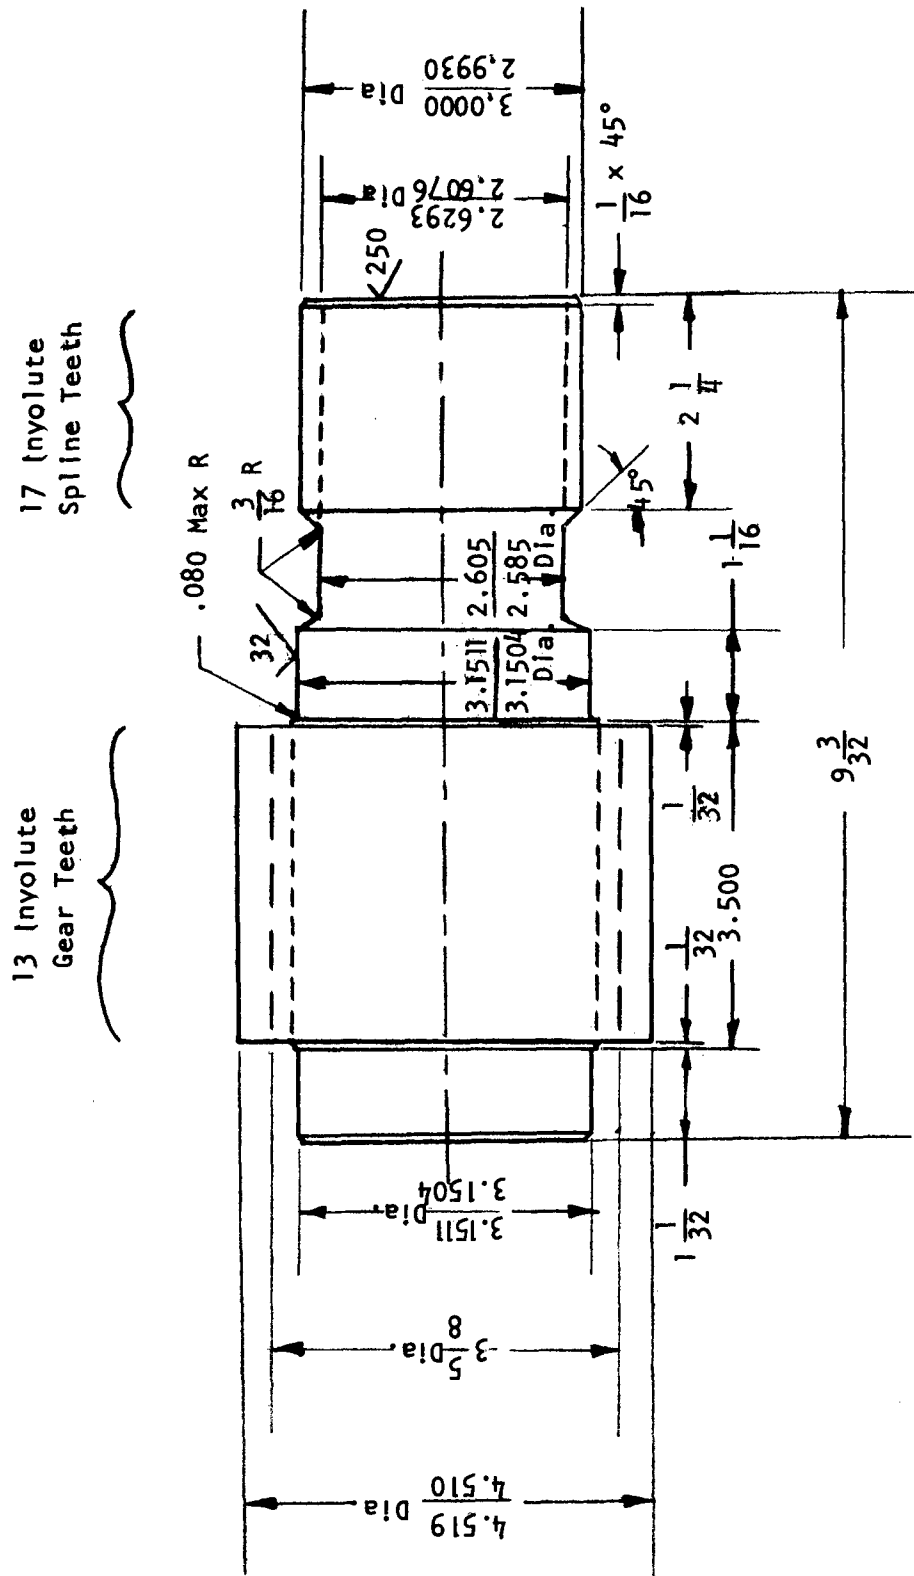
Final Drive Pinion Gear for M60 Tank.
